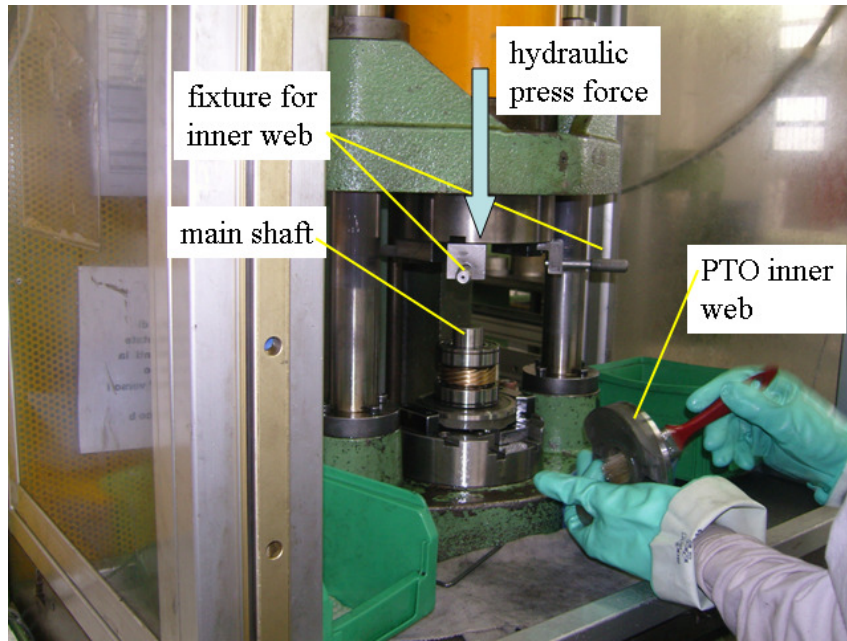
PTO inner web prior to assembly onto the main shaft [6].
